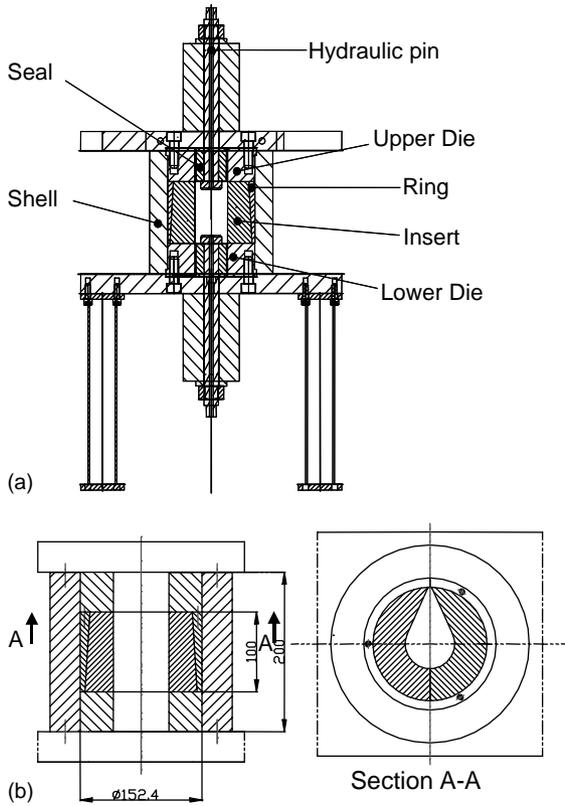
(a) Pear-shaped expansion tooling. (b) Sub-assembly showing die inserts, ring and housing.
